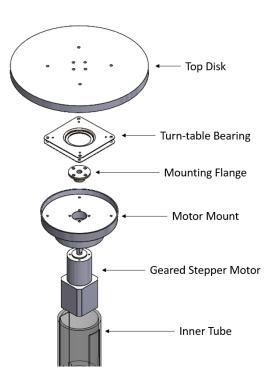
Exploded view of interface between the stepper motor and top disk. The stepper motor is attached to the inner tube with a motor mount, and attached to the top disk with a mounting flange and turn-table bearing.
